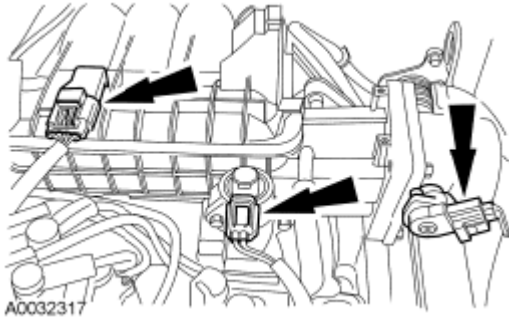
Identifying Manifold Absolute Pressure Sensor
